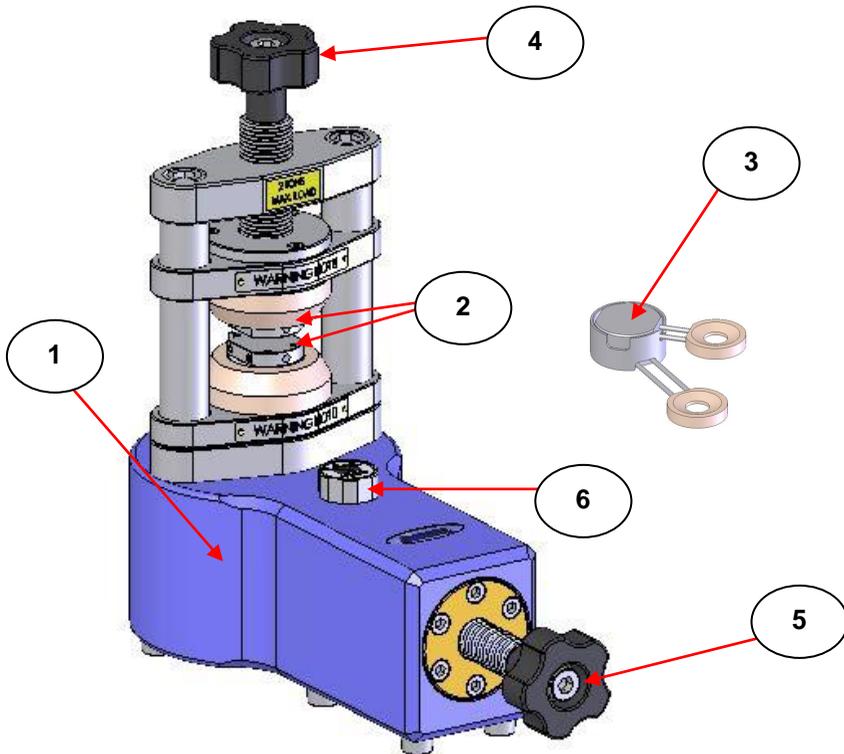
Mini-Film Maker Press (1) and Mini-Film Maker Assembly (3)
